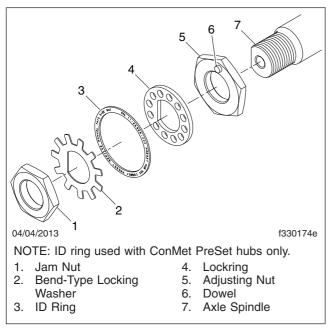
, Double Spindle Nut Set, With Locking Washer and Lockring
